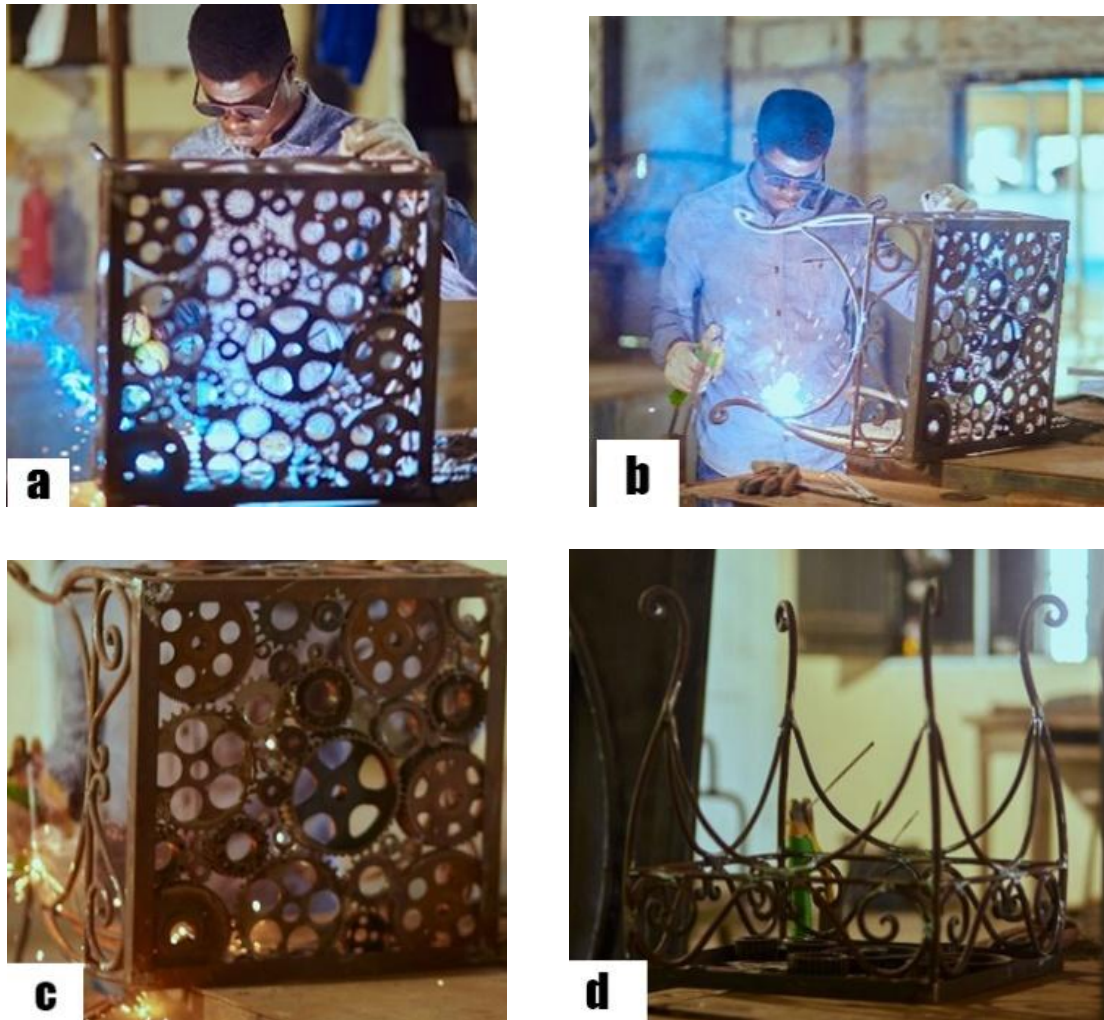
(A, B, C and D): Welding process of the coffee table
